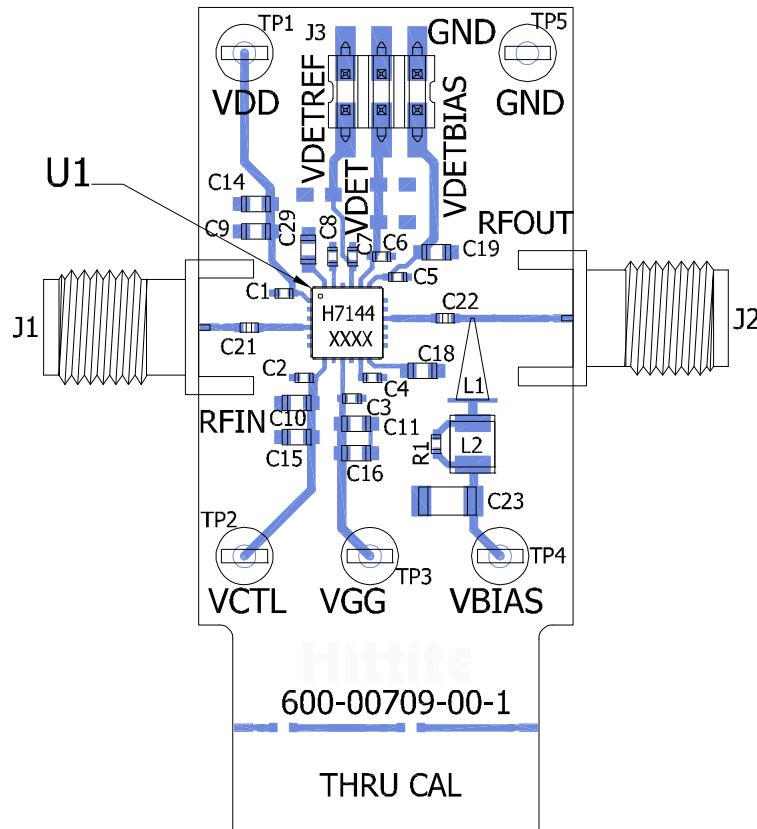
EVAL01-HMC7144LC4 Evaluation PCB
